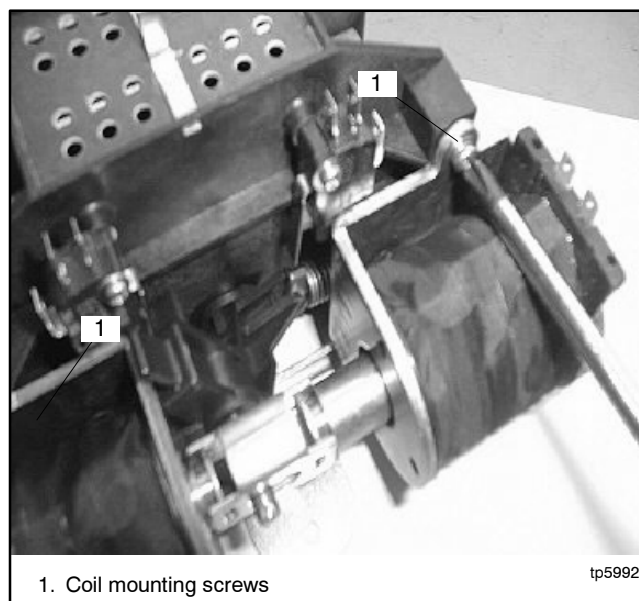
Loosen Coil Mounting Screws, 100 Amp Models
